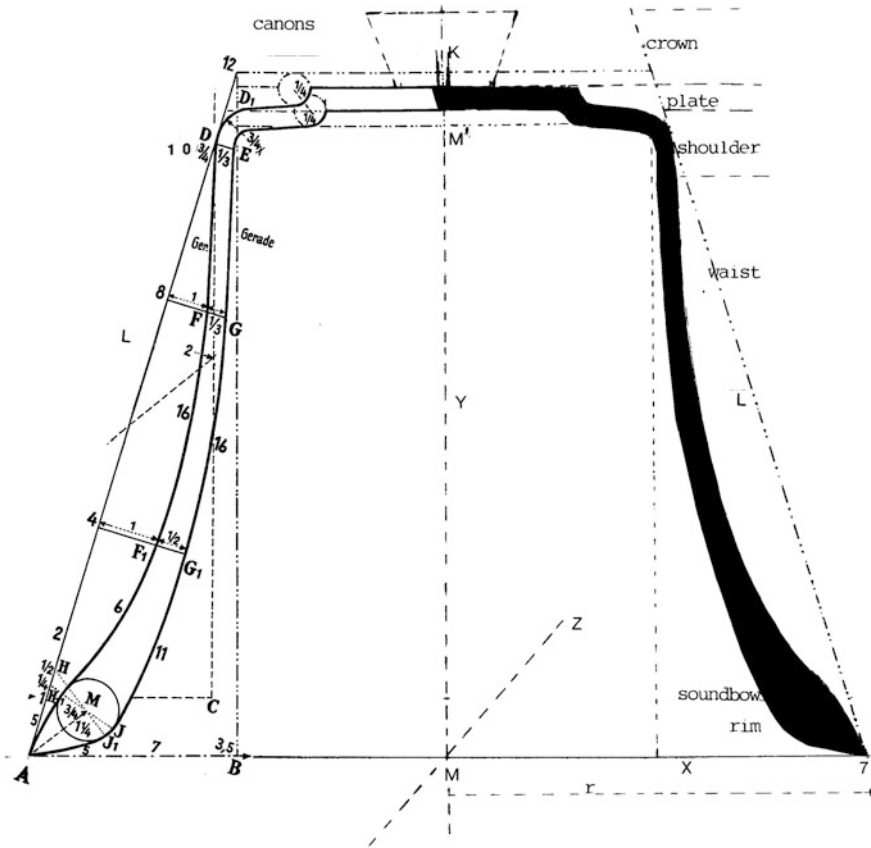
Bell wall profile, Geert de Wou (adapted from [11])
